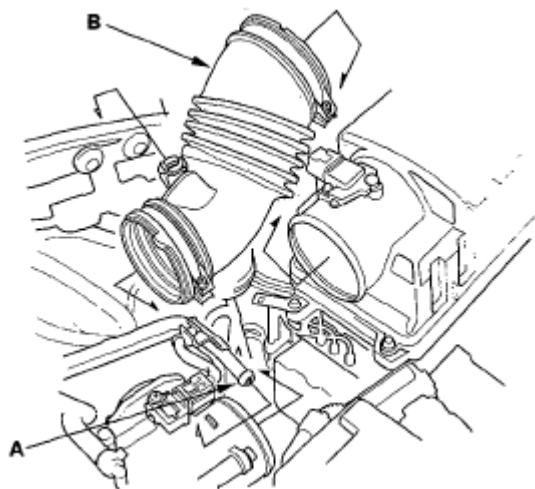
Identifying Breather Pipe And Air Intake Duct
